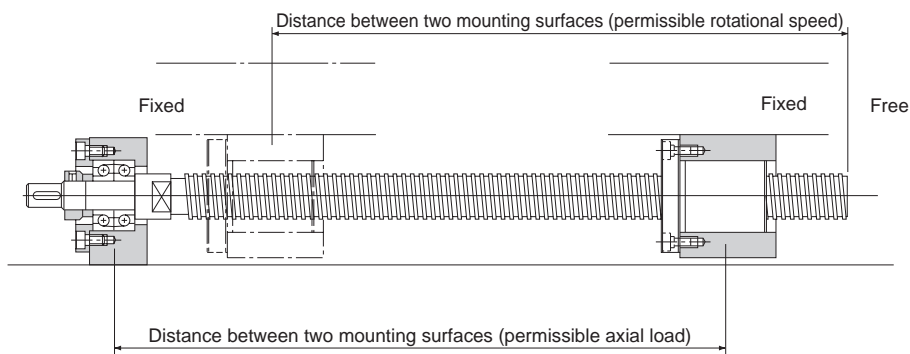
Screw Shaft Mounting Method: Fixed - Free
